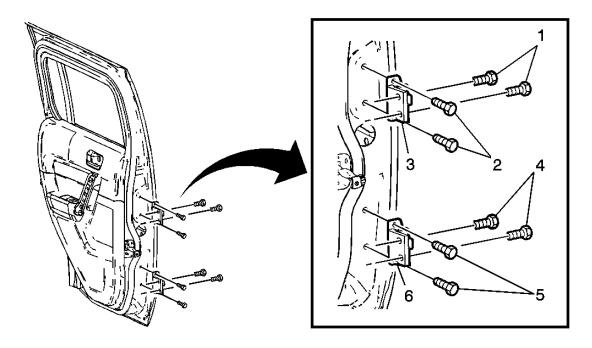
Rear Door Hinge Replacement Courtesy of GENERAL MOTORS CORP.
